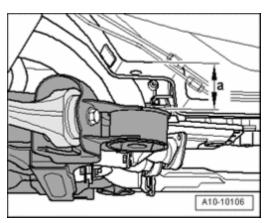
Lowering Engine/Transmission Assembly Using Scissor Lift Platform VAS 6131 Only Approx. By Dimension
